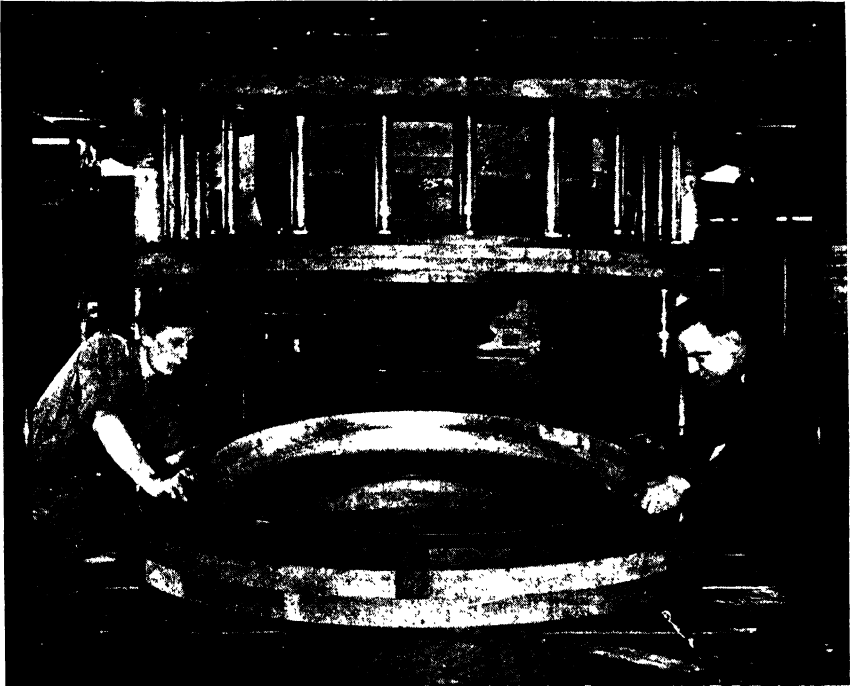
Large drawing die for producing a cowling ring, which is finally mounted around the front of airplane motors. The die, blankholder, and parts of the punch are composed of built-up laminated plates of Masonite die stock which are glued together. (View taken in Grumman Aircraft Engineering Corporation's plant.)
